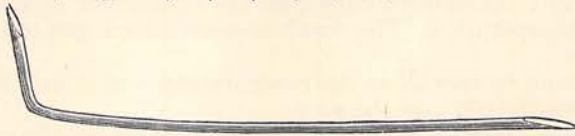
FIRST FORM. ON ENTERING MACHINE.
